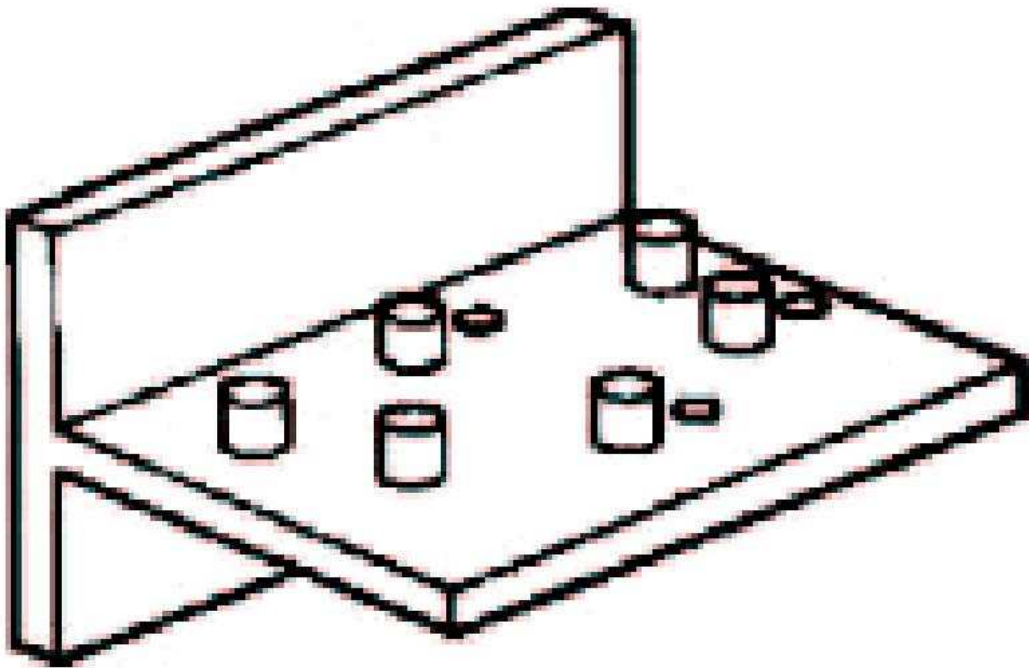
Identifying Service And Repair Tools - Tool # 24 4 110
